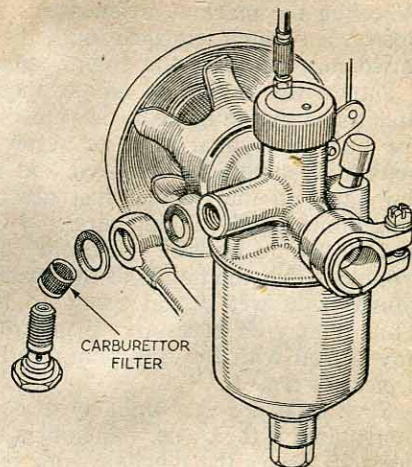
How the filter on the Villiers carburettor is dismantled for cleaning purposes
